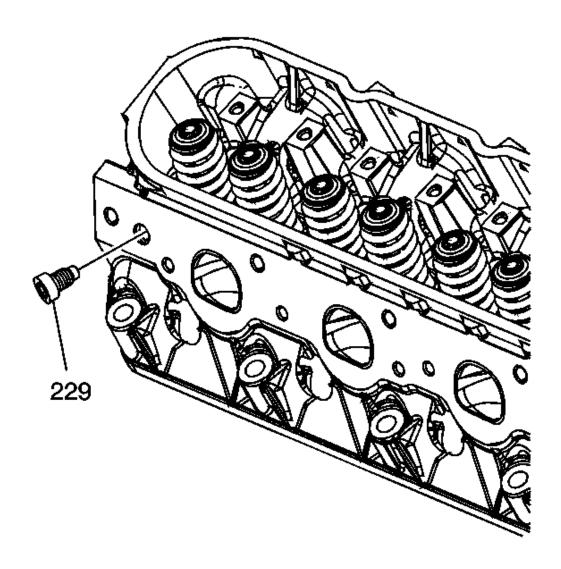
Locating Coolant Plug Courtesy of GENERAL MOTORS CORP.
